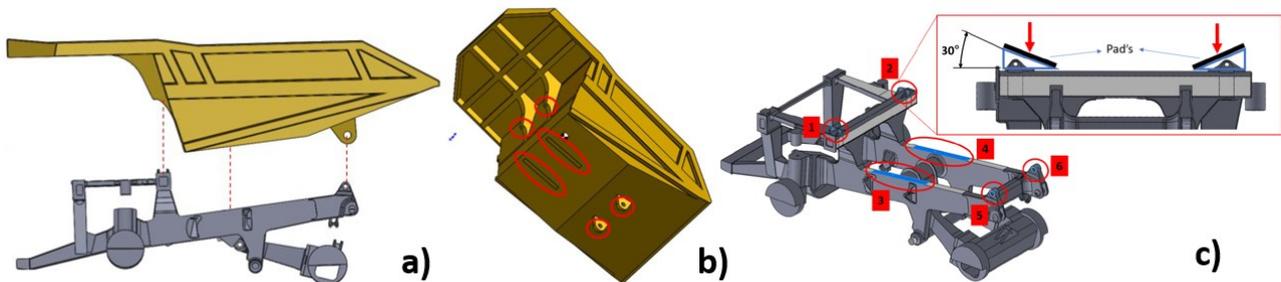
Bucket/chassis coupling points (a), bucket contact points (b) and chassis contact points (c)
